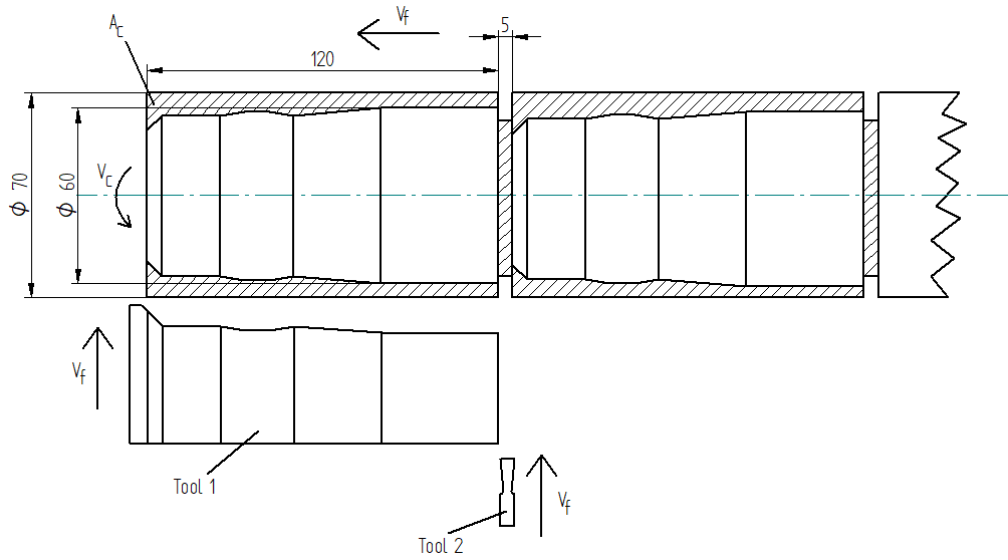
Workpiece blank with finished diameter, showing tool kinematics
